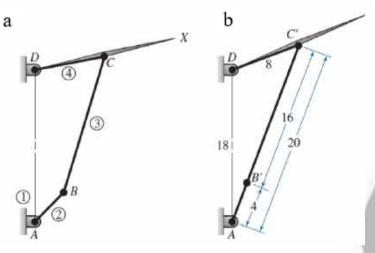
(a) Starting Position Conveyor Segment Movement Mechanism. (b) Maximum Position Conveyor Segment Movement Mechanism
